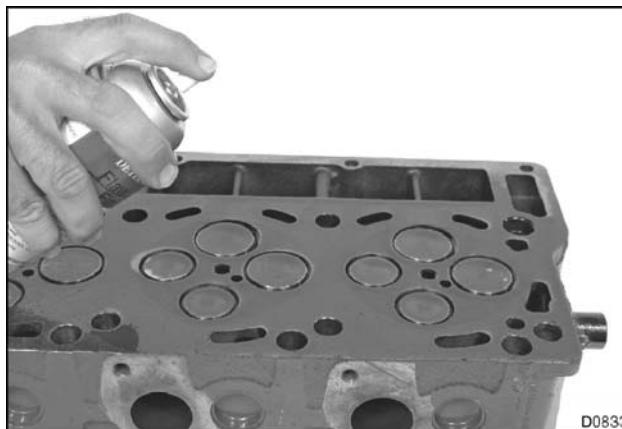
Dye penetrant sprayed on cylinder head (typical)
